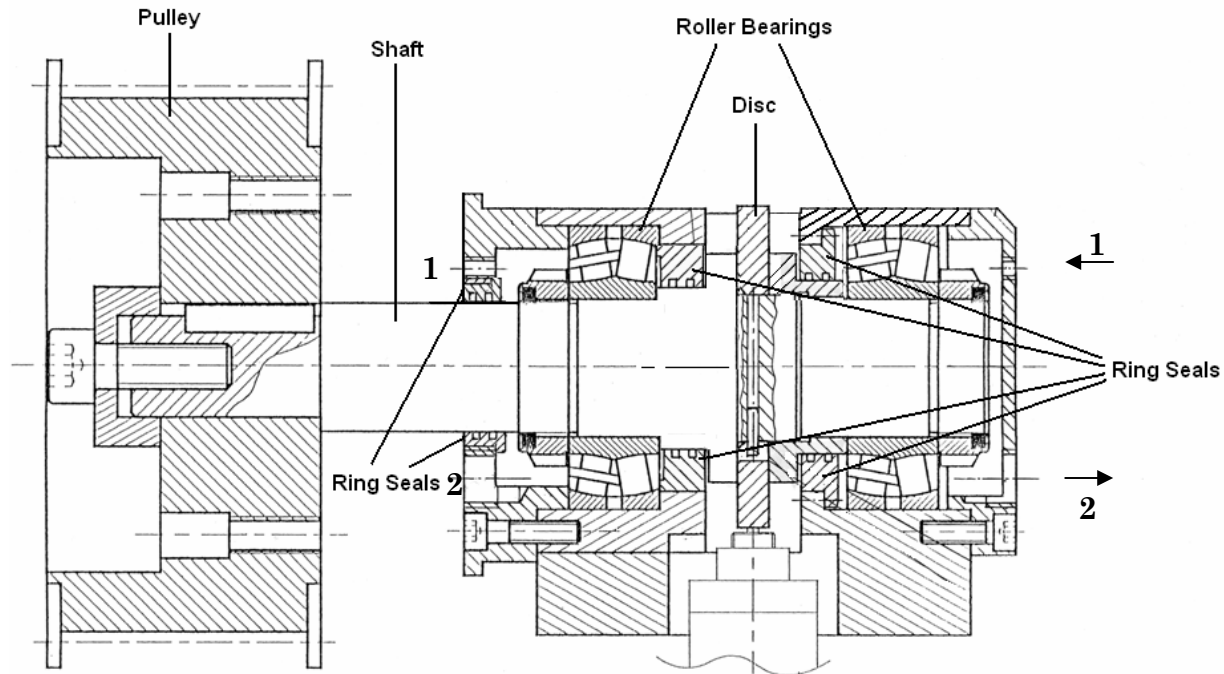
Detailed drawing of the discs box for the modified twin-disc machine design.
